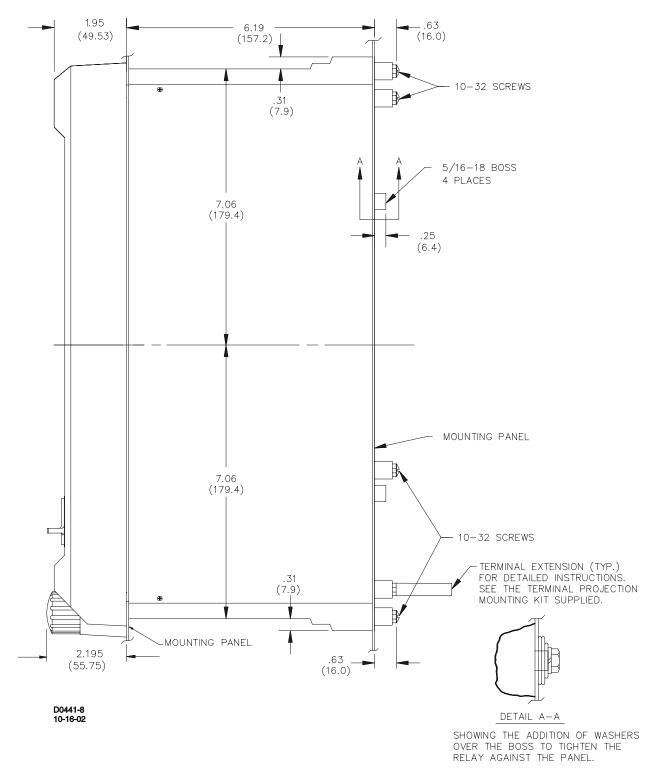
Outline Dimensions, Side View - Projection Mounting
